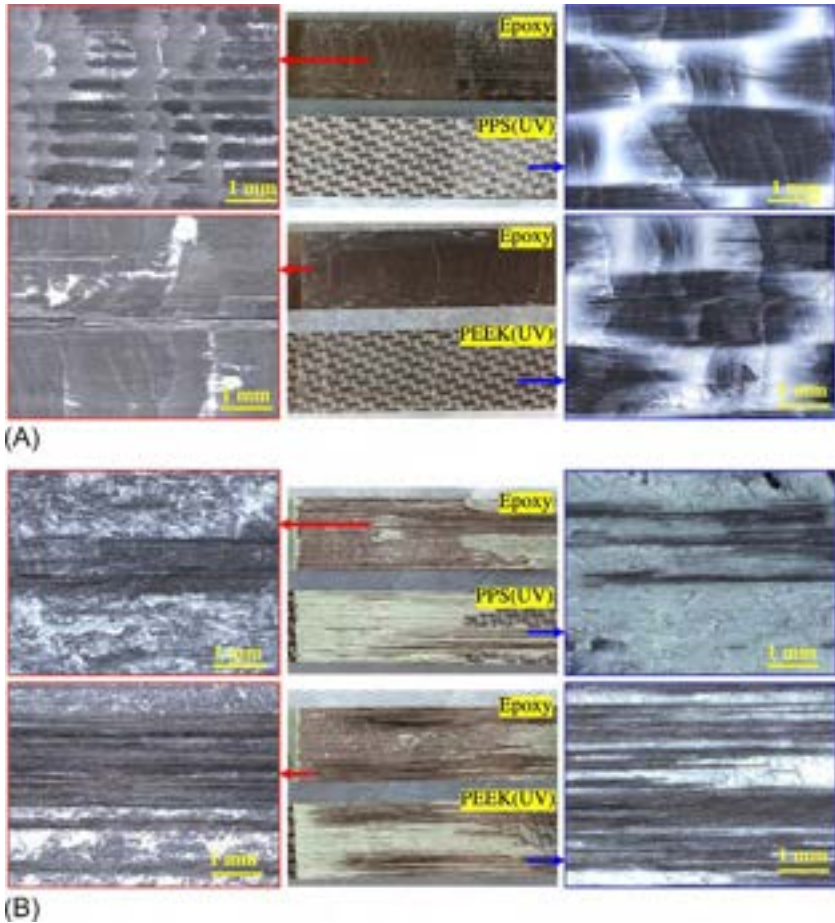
Typical images of the fracture surfaces of the DCB specimens of the TPC-TSC joints: (A) without film adhesive and (B) with film adhesive.
